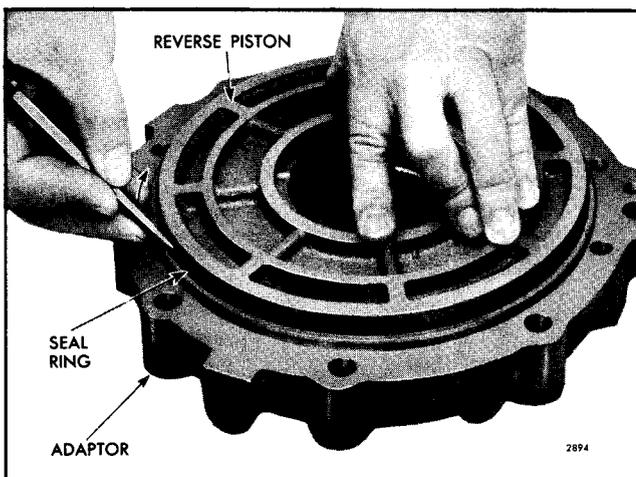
Installing Reverse Clutch Piston in Adaptor
